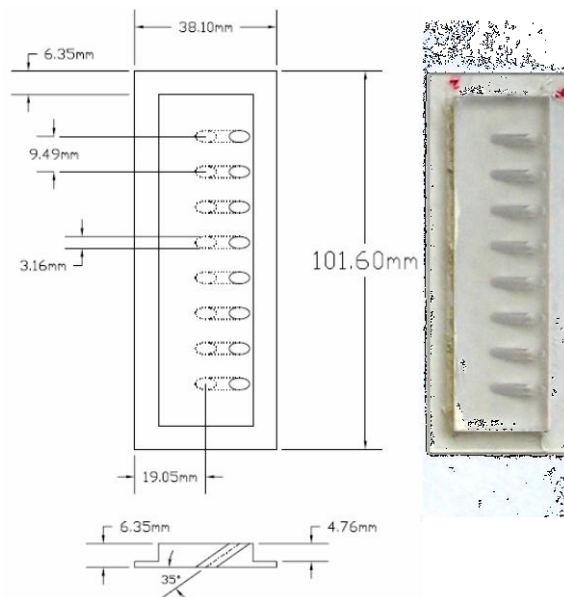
Nominal cylindrical hole coupon (DA0) design vs. manufactured piece
